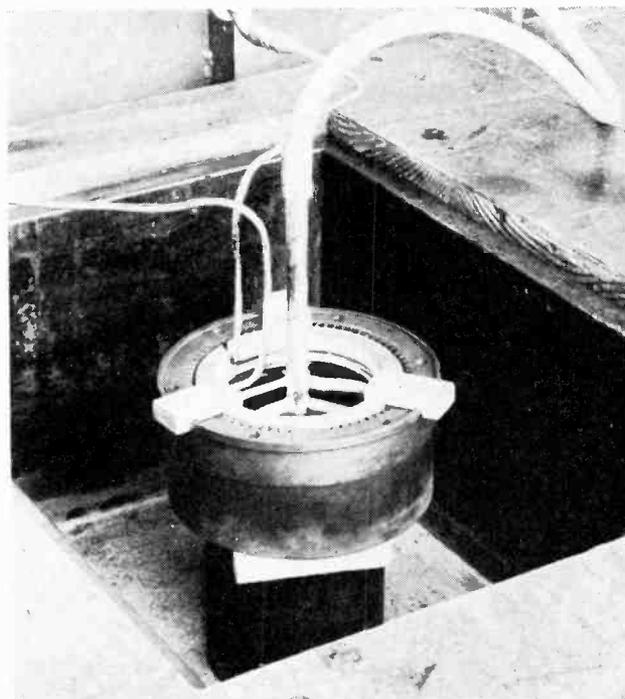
Internal-gear-tooth hardening at 450 kilocycles.
